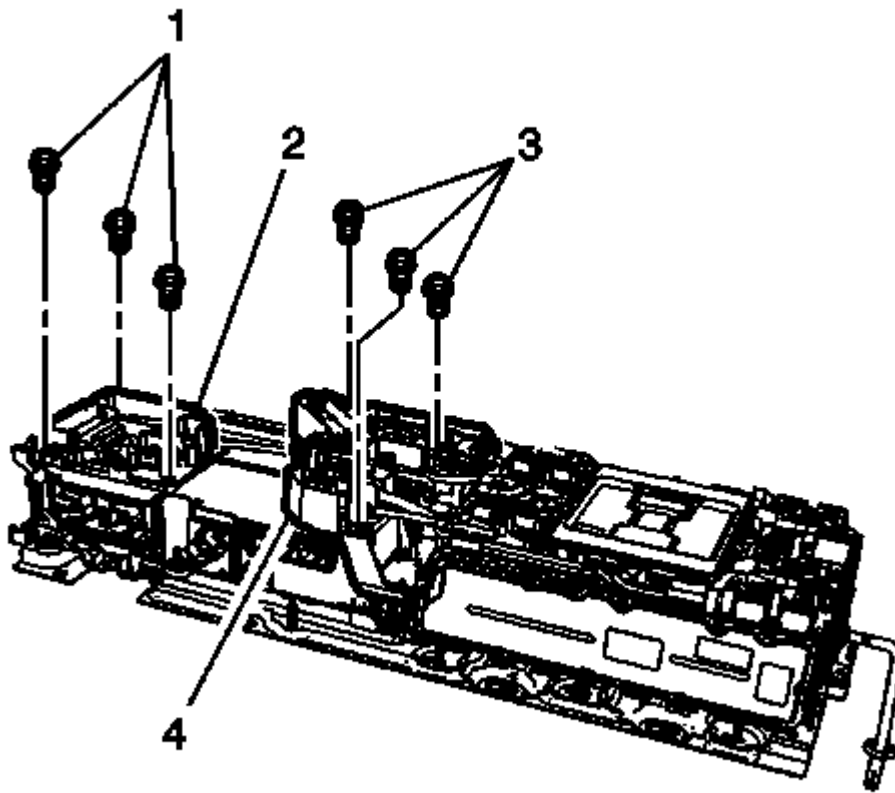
Drive Motor Battery Wire Junction Block Relay
